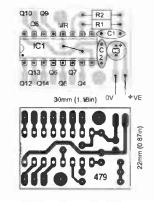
Simple Cycler printed circuit board component layout and foil master.
